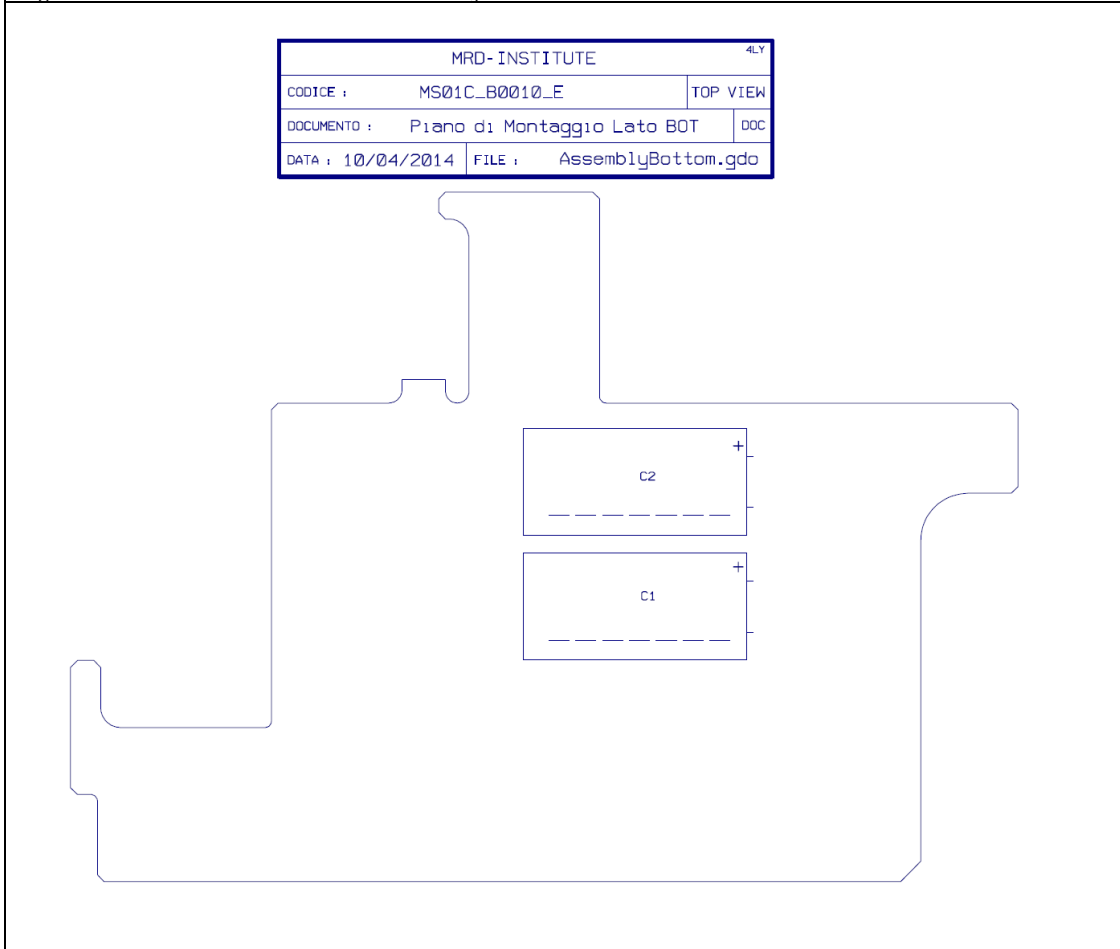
WMBUS 169MHz board layout: BOTTOM view
